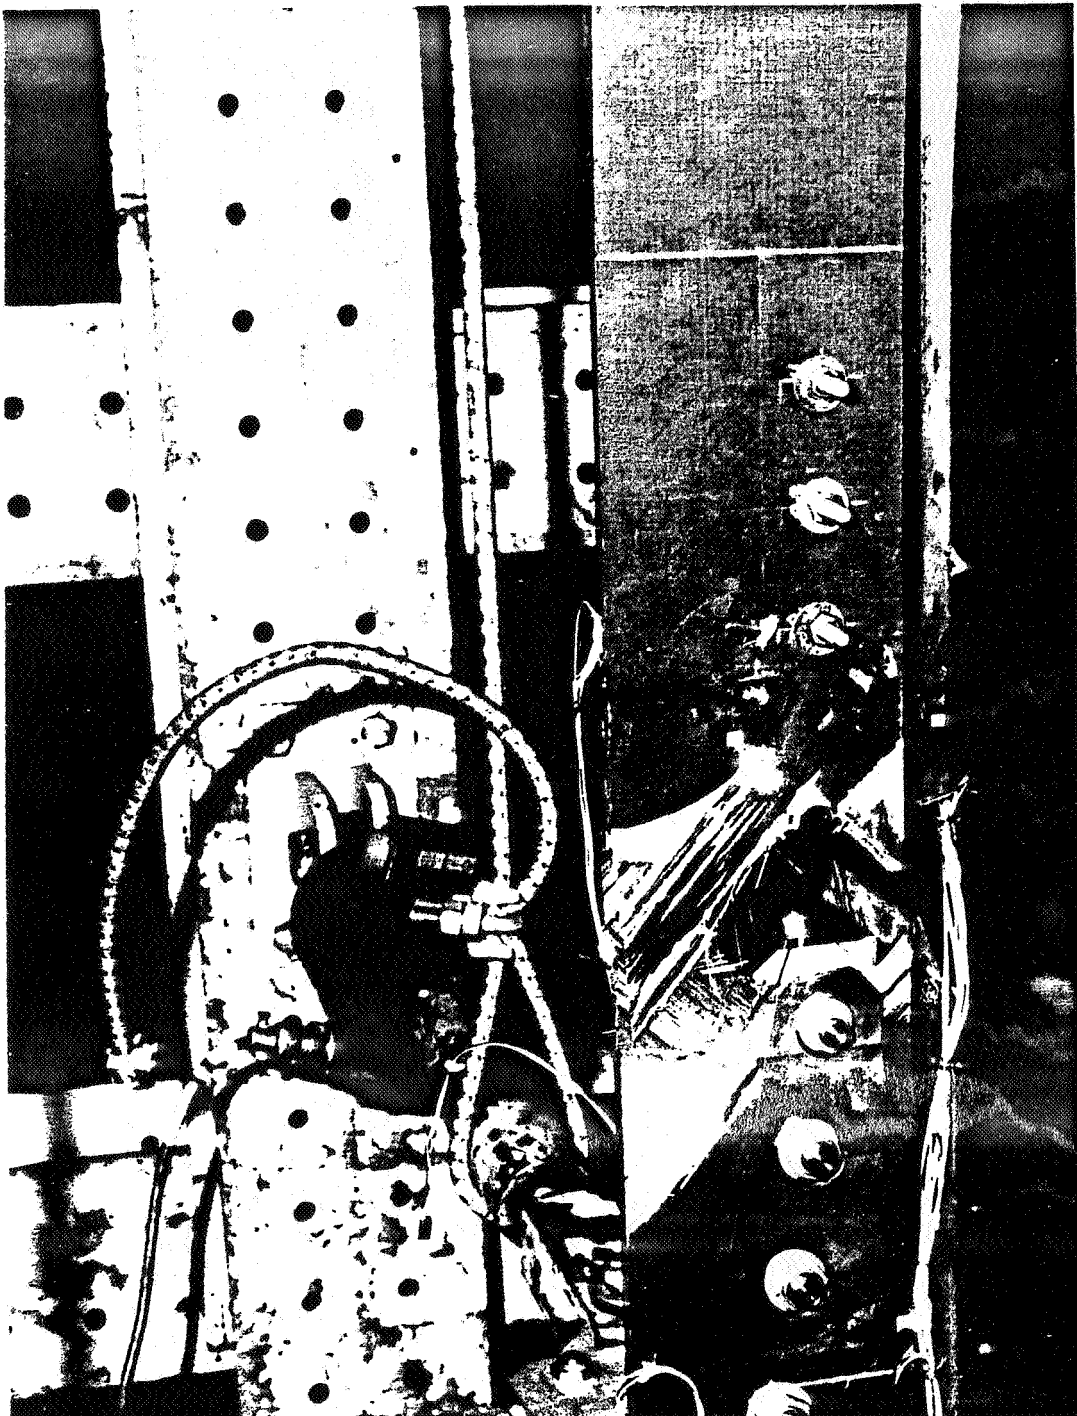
TECHNOLOGY DEMONSTRATION - TEST SECTION FAILURE
